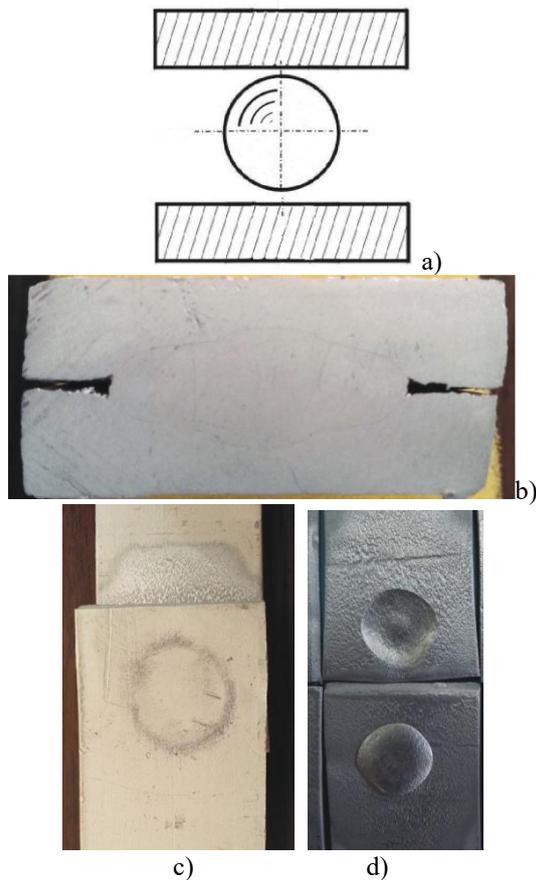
Cold welding with flat plates and a spherical intermediate element
